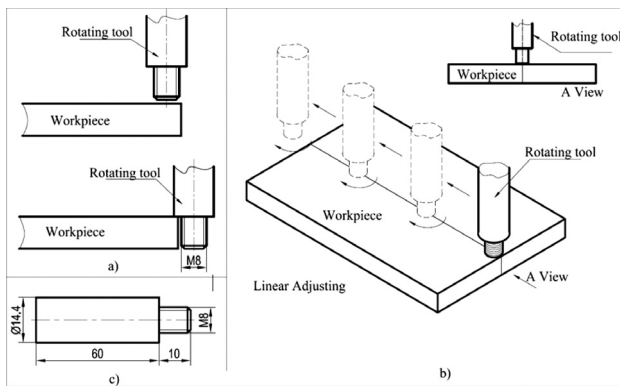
a) Tool approaching the workpiece, b) adjusting the tool before the welding, c) drawing of the tool^{30,31}
